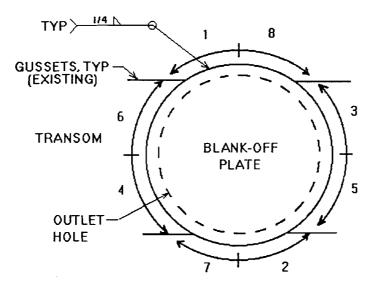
F.B. PROPULSOR OUTLET WELDING DETAIL
